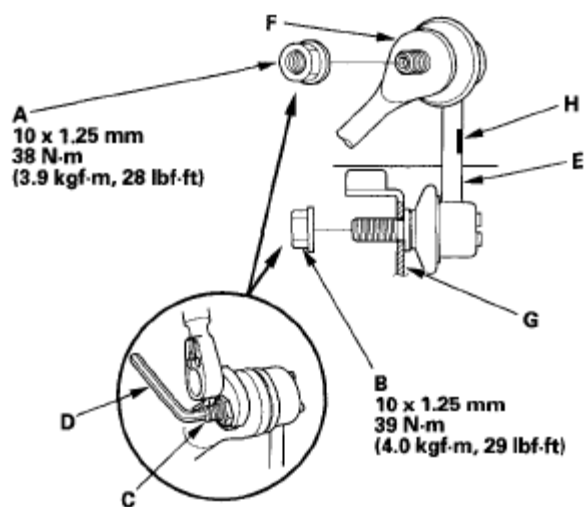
Identifying Self-Locking Nut And Flange Nut (With Torque Specifications)
